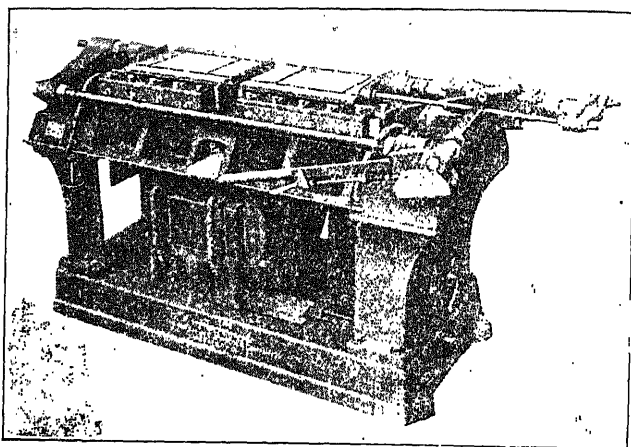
Federal Heavy-Duty Butt-Welding Machine.
